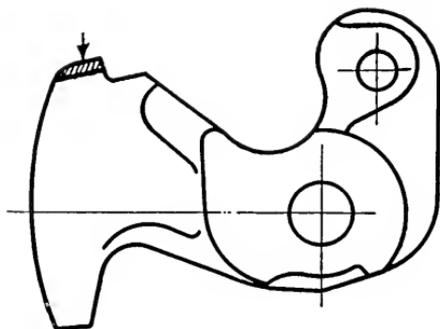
Reclaimed Major Knuckle by Electric Weld
